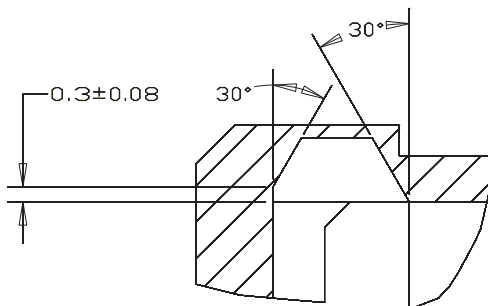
Slimline Device plug connector interface dimensions (Detail F)
